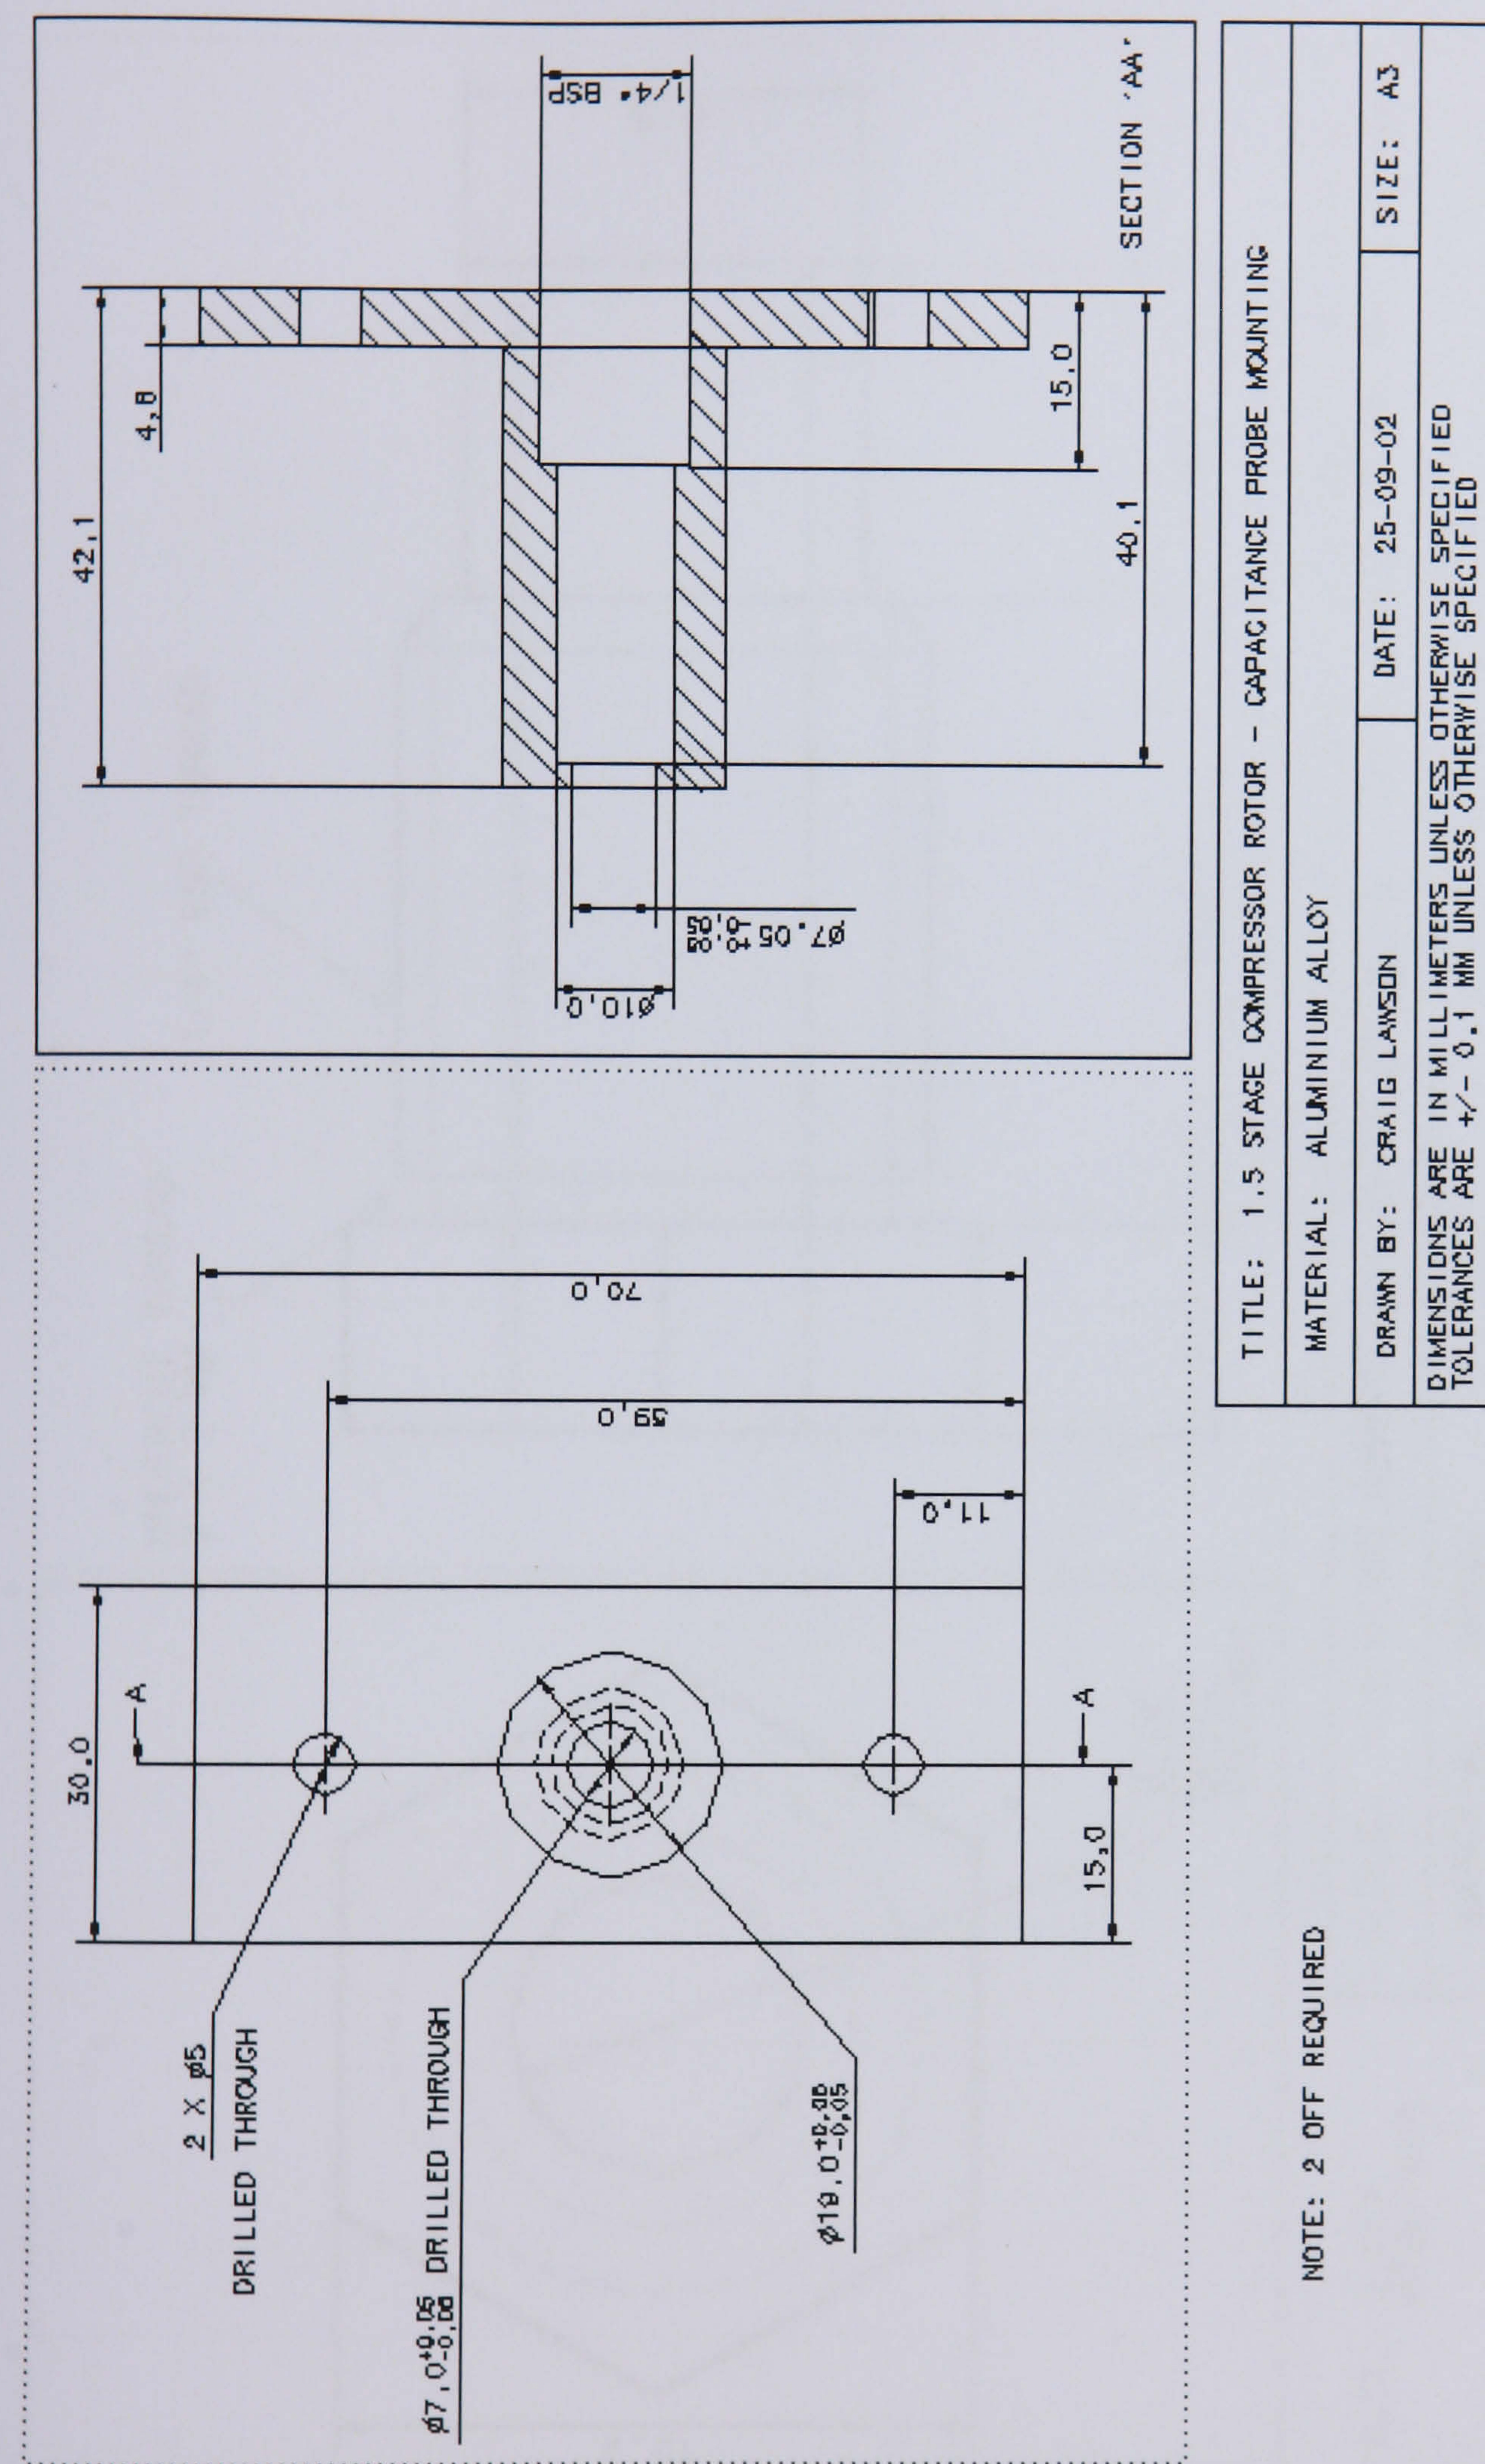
Capacitance Probe Socket Engineering Drawing
